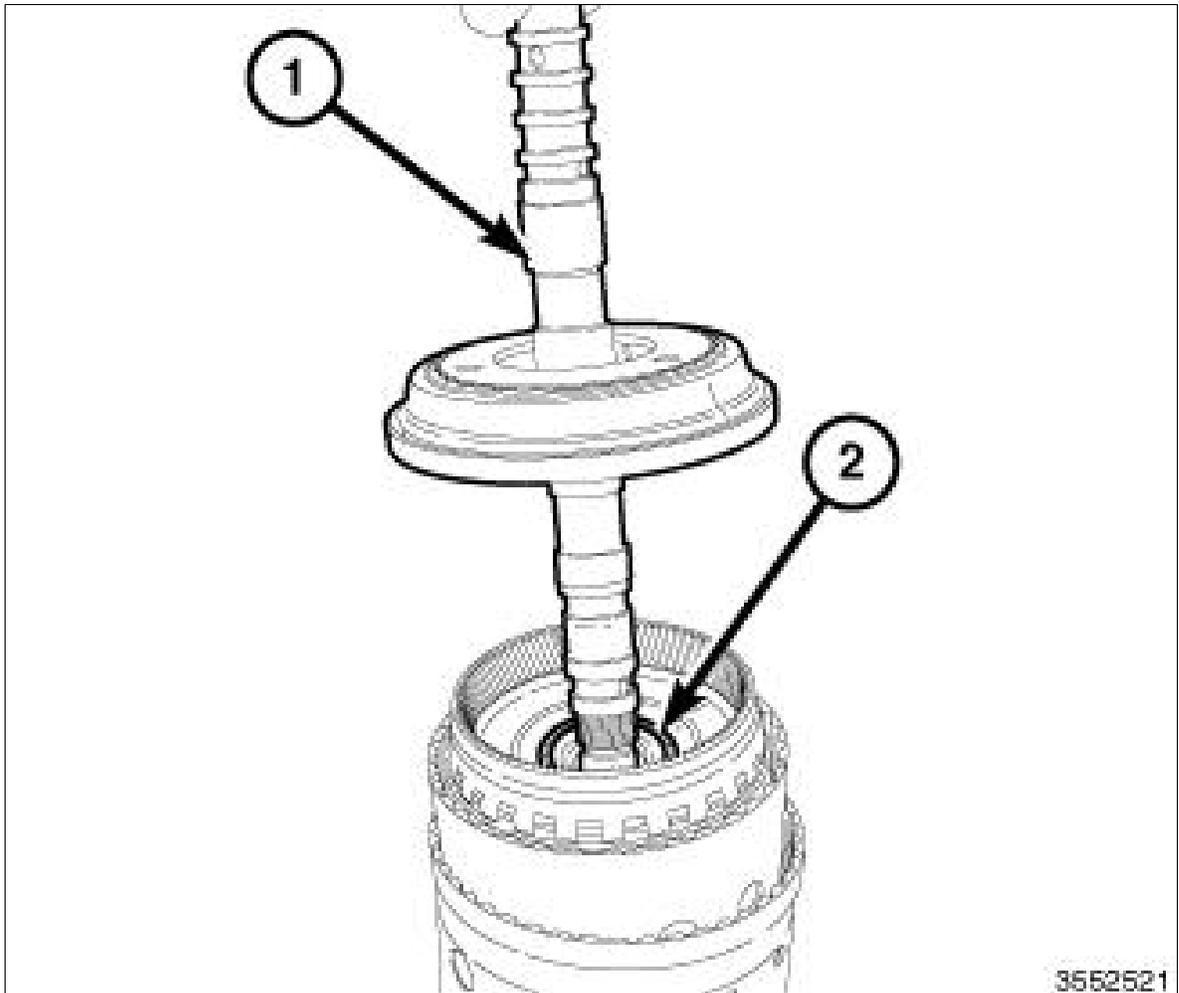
P2 Annulus/P3 Sun Gear & Drum Assembly
